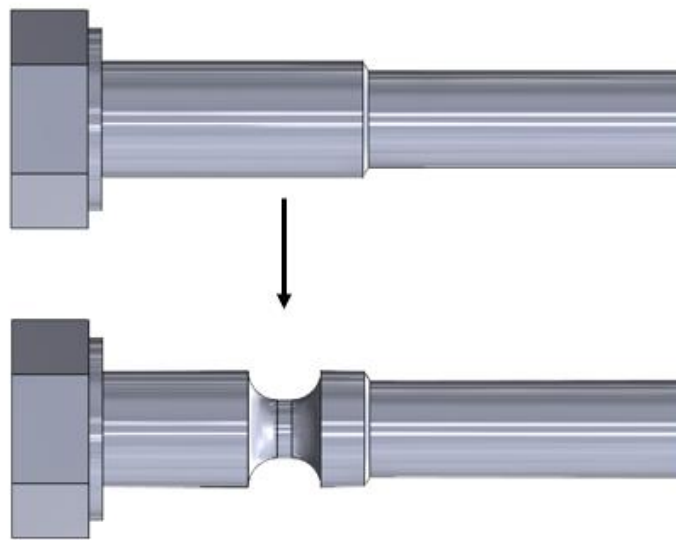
Example of a standard bolt customized to have a notch (threads omitted).
